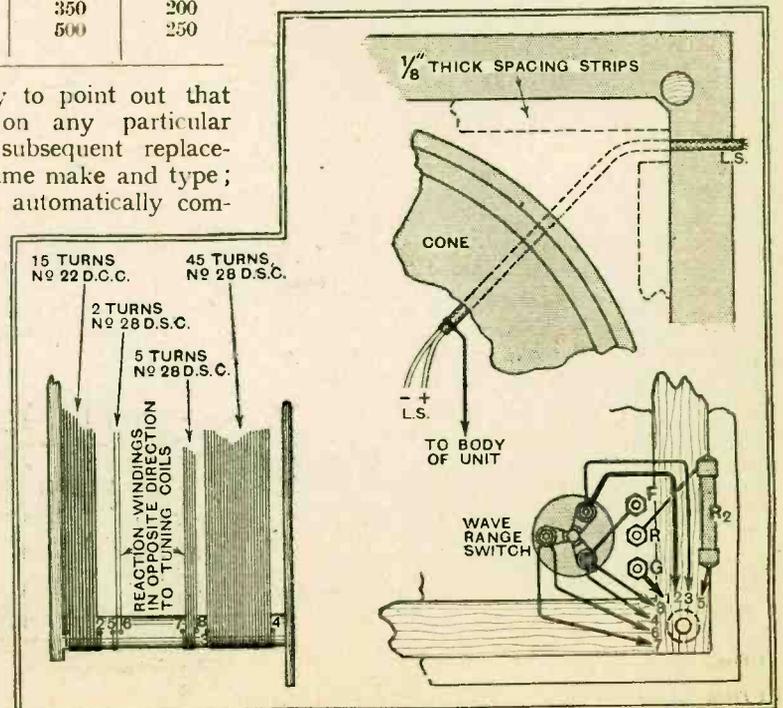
Constructional details and connections in the frame aerial—loud speaker unit.
